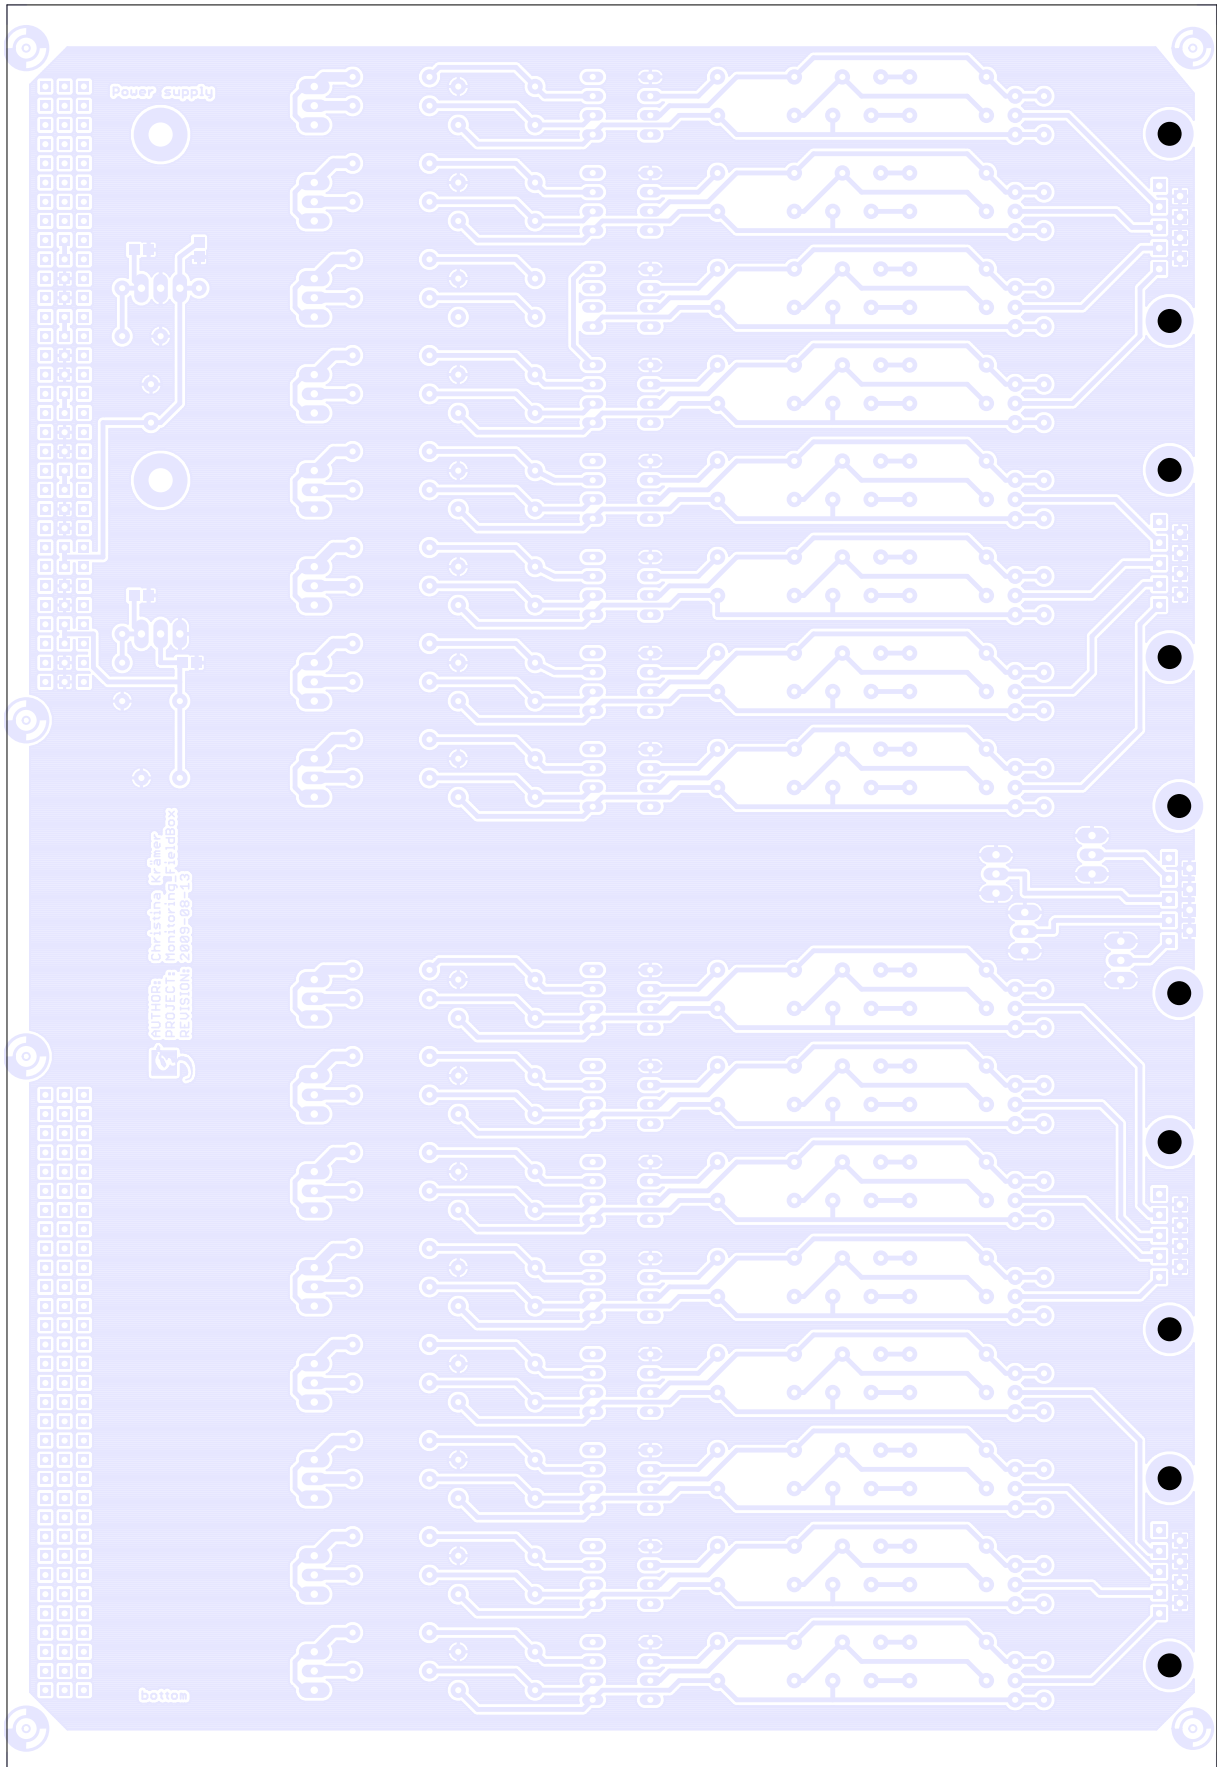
Board bottom view showing drills with 3.2 mm (0.125 in) diameter
